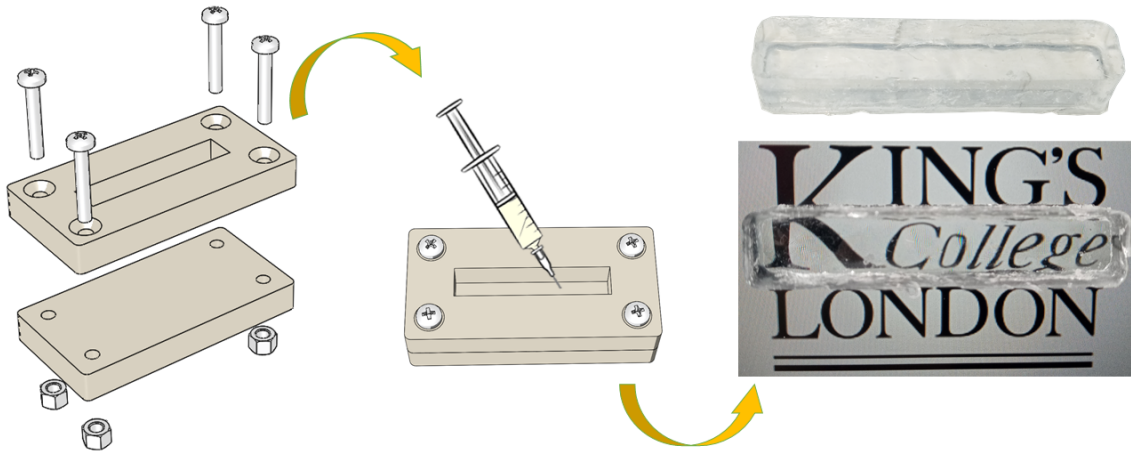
Fabrication of the core material sample. A CNC machined mould made by two parts which can be unscrewed facilitates the removal of the sample, once cured. The resulting sample seems to have pretty smooth surfaces and good transparency.
